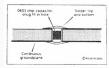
G4DGU's Technique Using an 0603 SMD Chip Capacitor mounted directly through a hole in 1.6 mm PCB.
